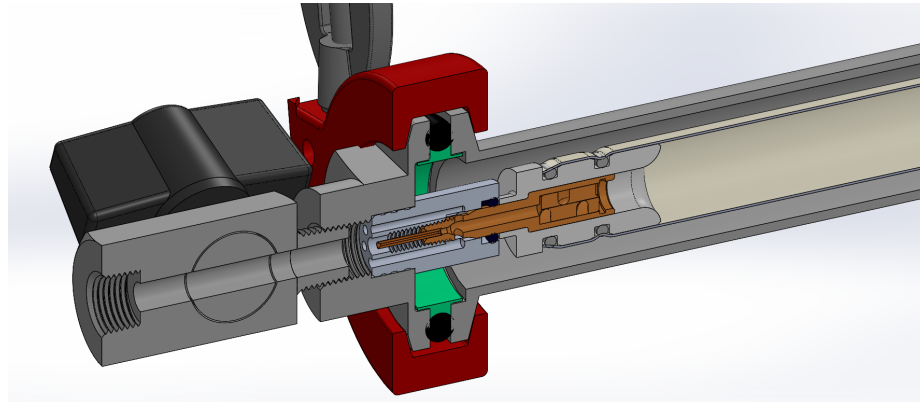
Helium gas input connected to a sMDT tube placed inside the vacuum vessel for the gas tightness test.
